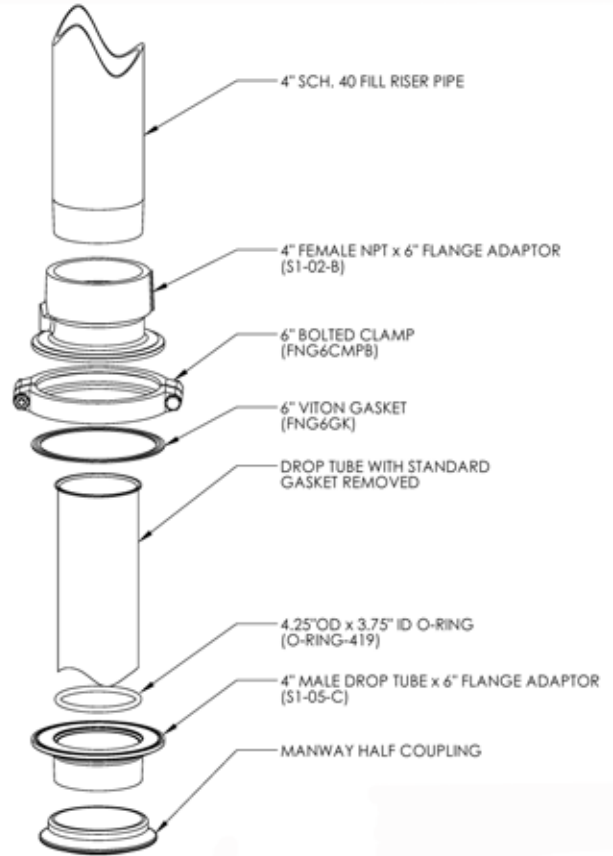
Drop Tube Installed with O-Ring Below Fill Riser Pipe
